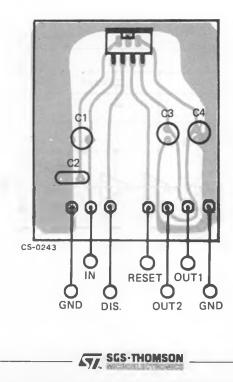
P.C. board and component layout of the circuit of Fig. 2 (1 : 1 scale)
